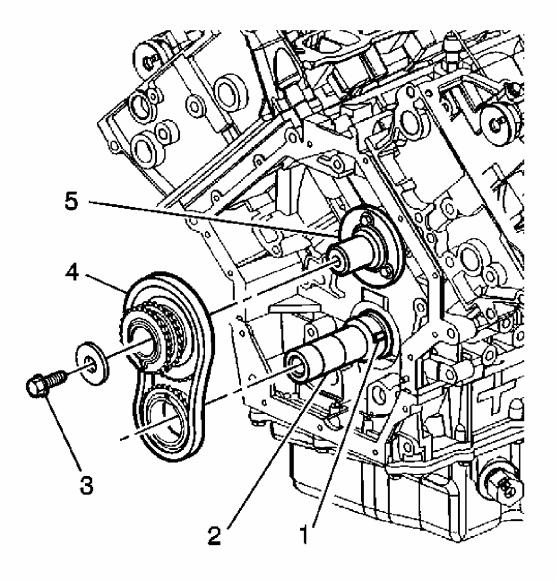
Identifying Camshaft Intermediate Sprocket Retaining Bolt & Camshaft Drive Chain
